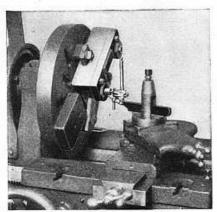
Boring a Jig Plate on an 18-inch Tool Room Lathe
